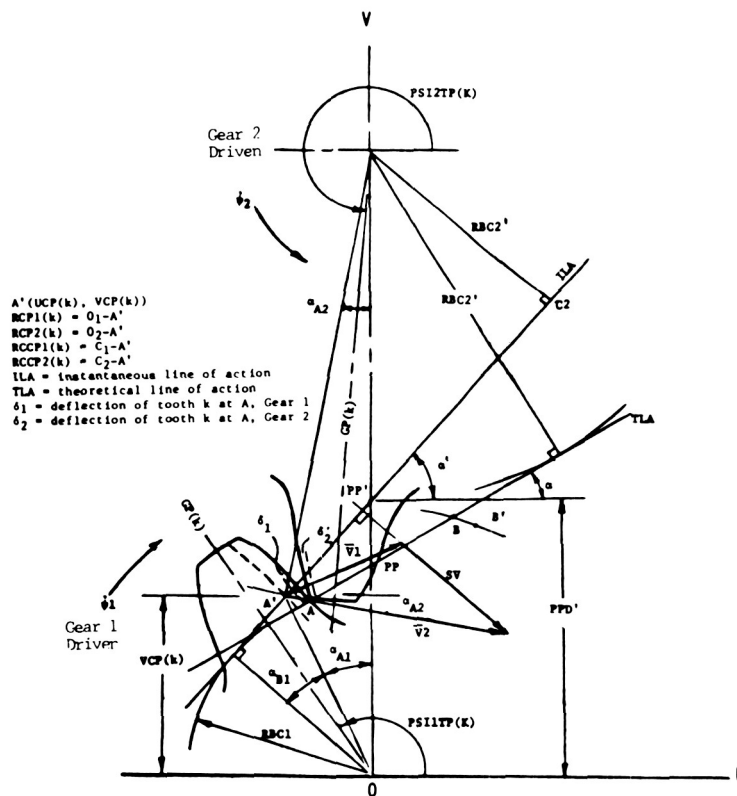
Instantaneous contact point for incoming gear tooth pair.
